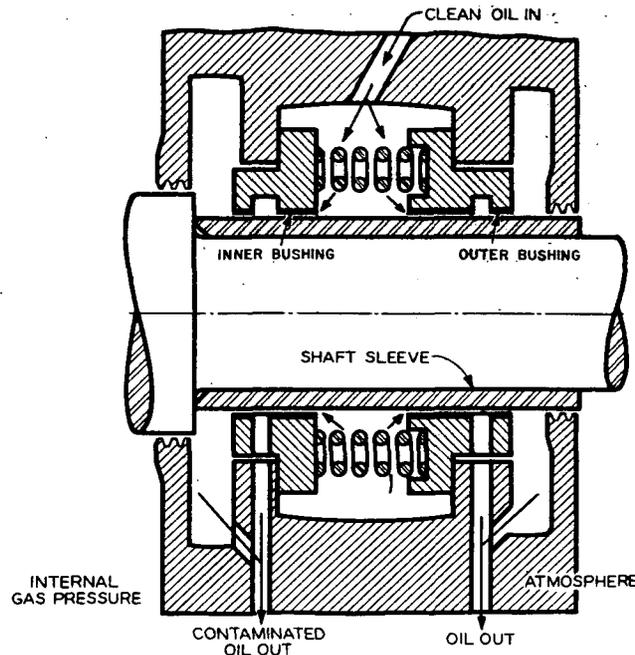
Liquid-film shaft seal with cylindrical bushing.⁵³
